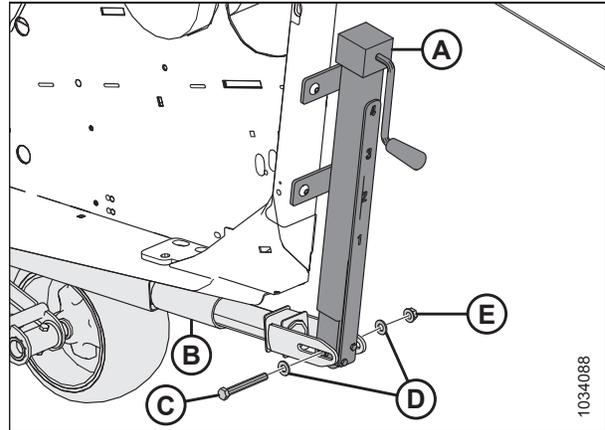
Jack and Outboard Wheel Assembly – View from Rear
